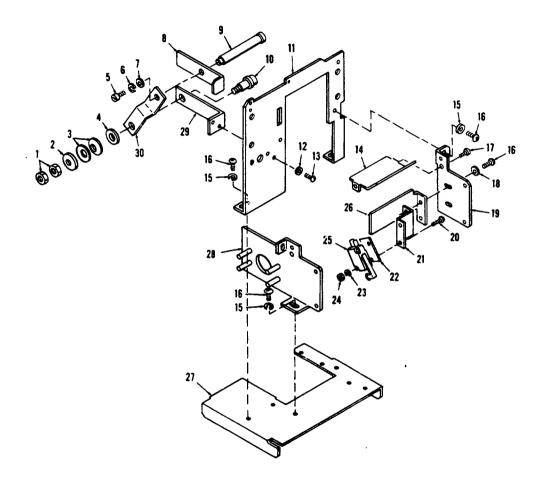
PRINTER FRAME ASSEMBLY (Part 2 of 2).
